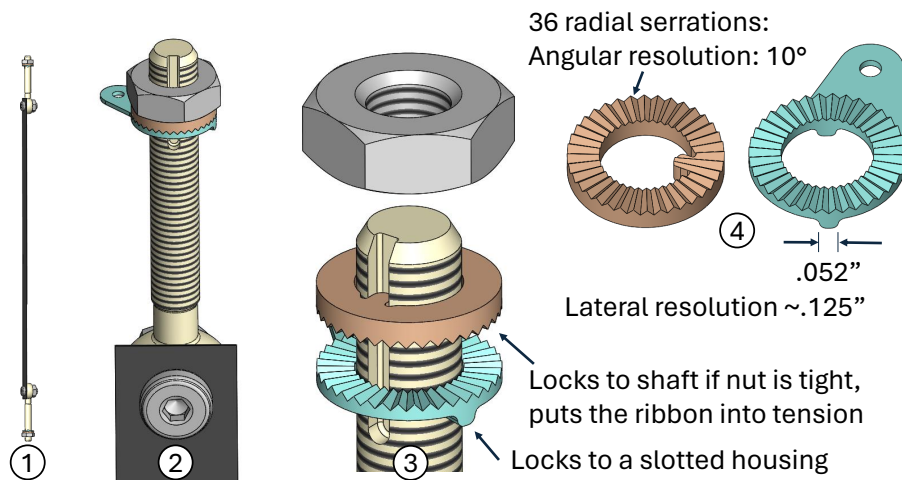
(1) A full ribbon, (2) Closeup, (3) Exploded view, (4) PILD detail.
